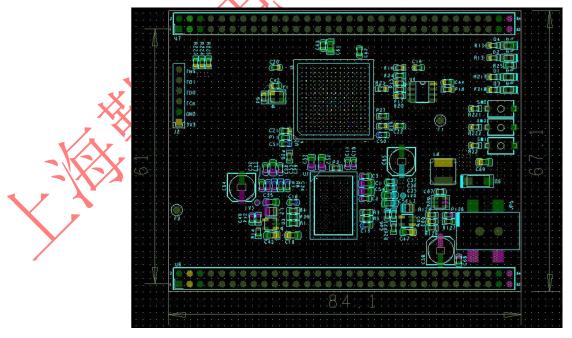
QM_XC6SLX25_DDR3 Core Board Dimension
